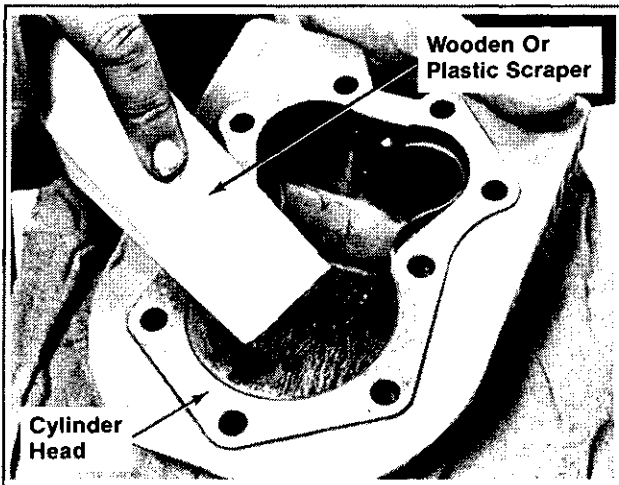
Cleaning Cylinder Heads and Combustion Chambers.
